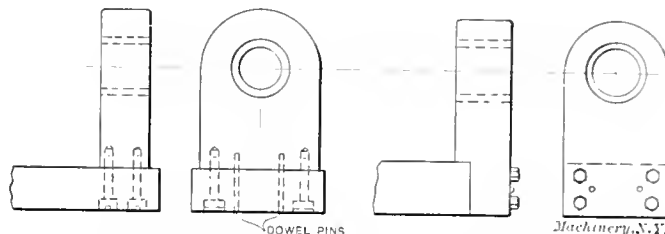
and 112. Different Methods for Securing and Locating the Uprights on Base Plate of Boring Jigs.
